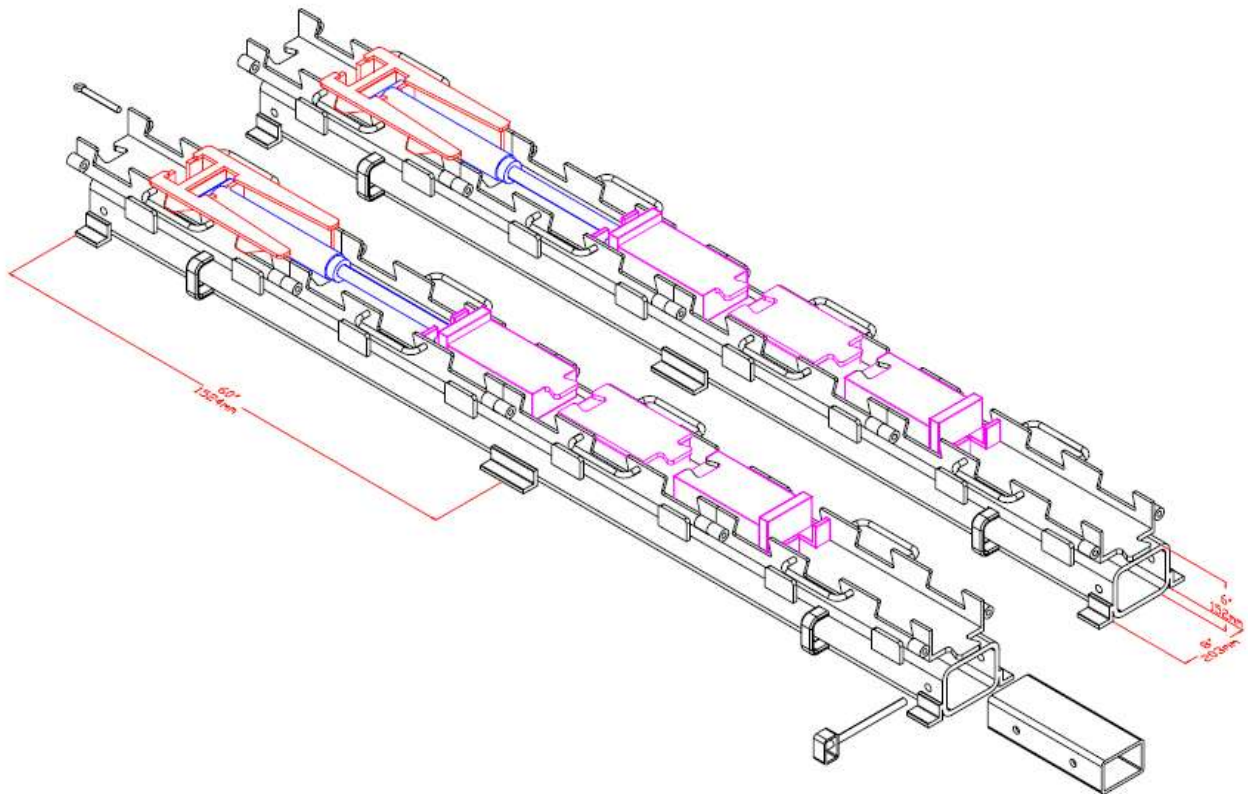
M100 Modular Hydraulic Skidding System (shown with optional support beams & filler shoes)
